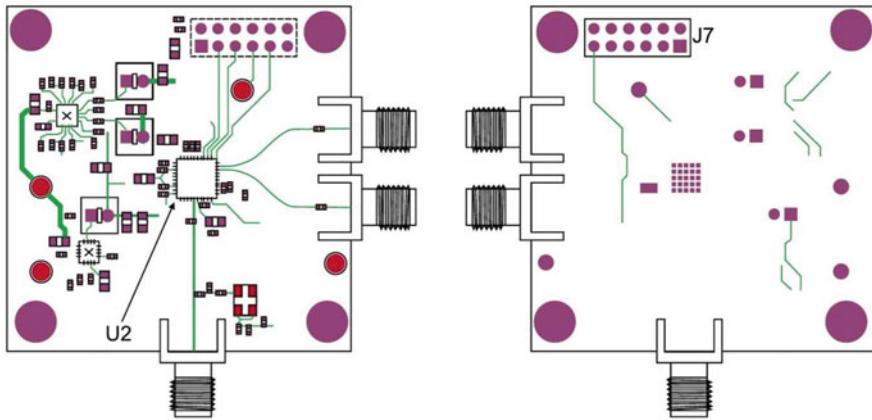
Assembly of chip HMC829LP6GE on printed circuit board [2]
